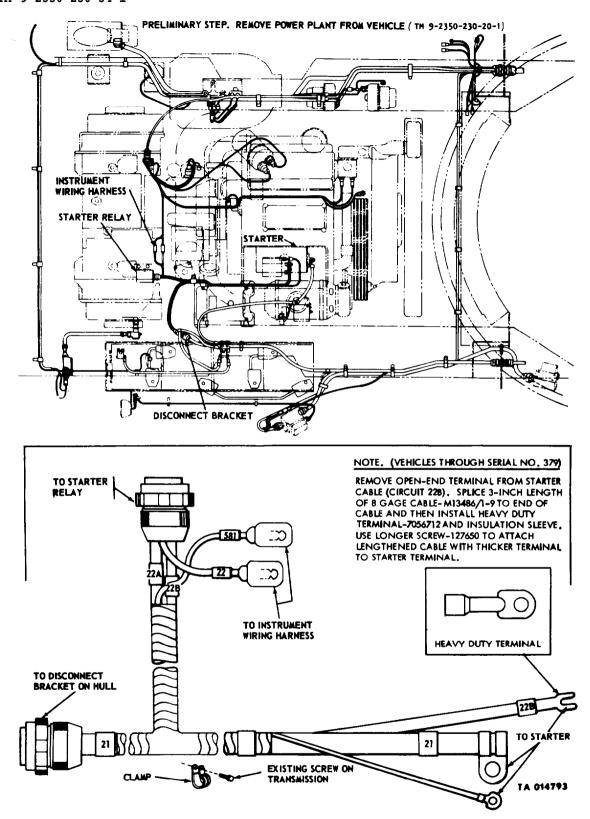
Removal/installation-engine disconnect-to starter wiring harness
